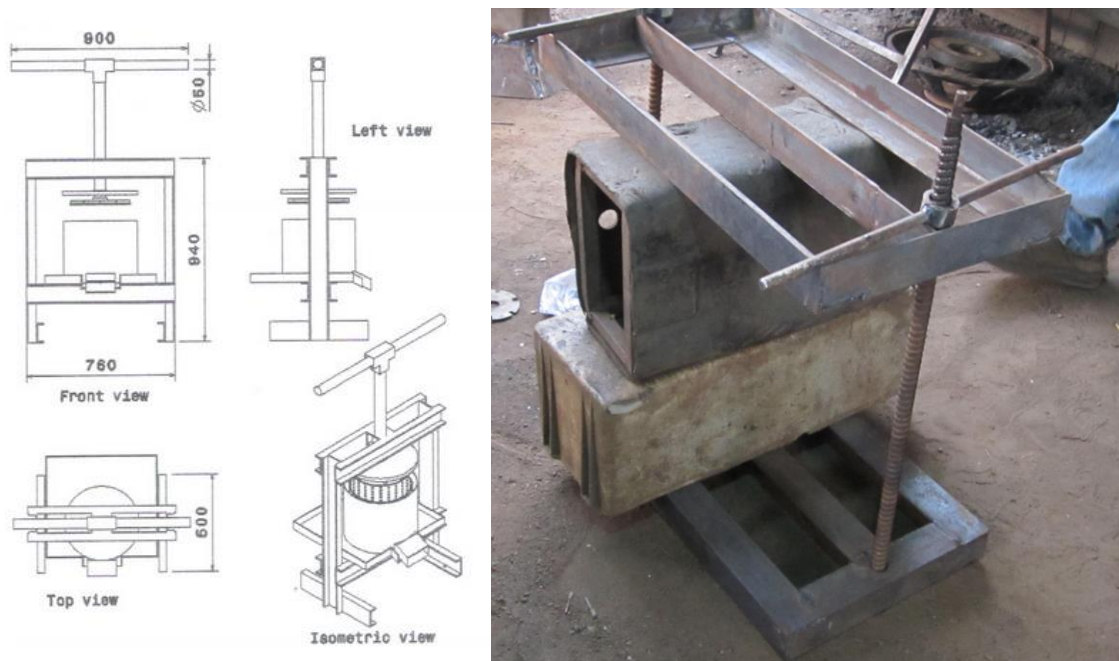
Figure A. Shea butter single-lead screw press & mini double-lead screw press
